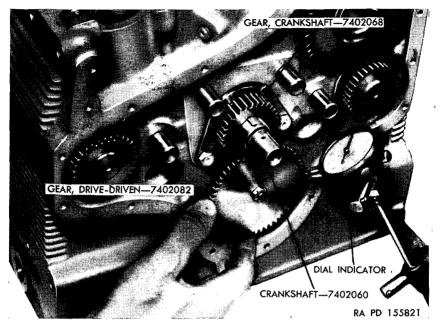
Checking back lash between oil-pump drive-driven gear and crankshaft gear.
